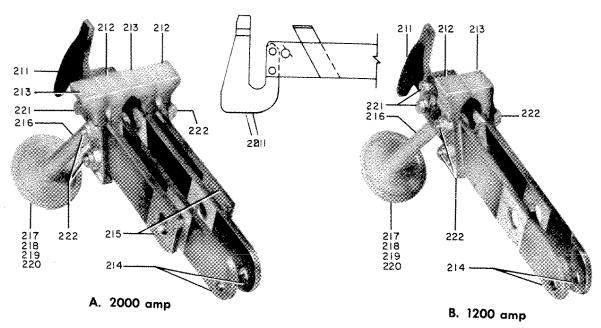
Movable contact arm assembly (Ref. No. 210)
